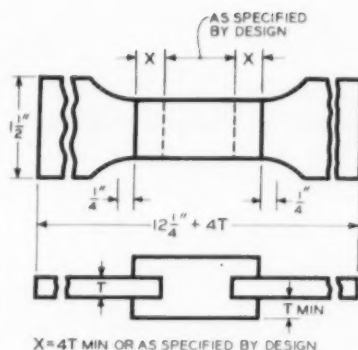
Reduced-Section Tension Test Specimen for Rabbet Joints
